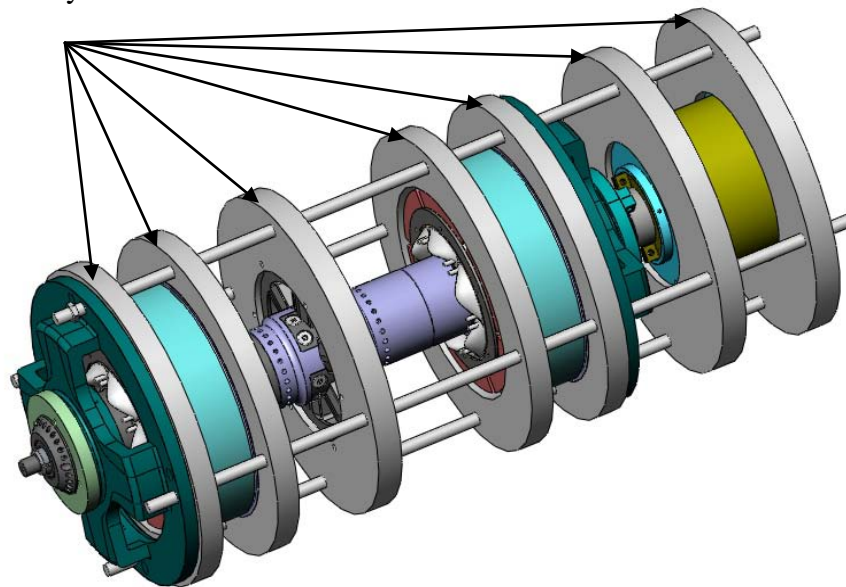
Seven stator plates of the EEC magnetic bearing system
